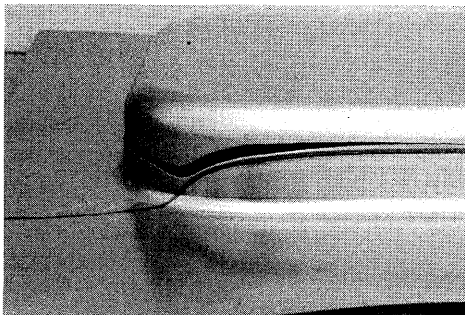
Fracture in the thinner/weaker partner parallel to the weld (type A)
